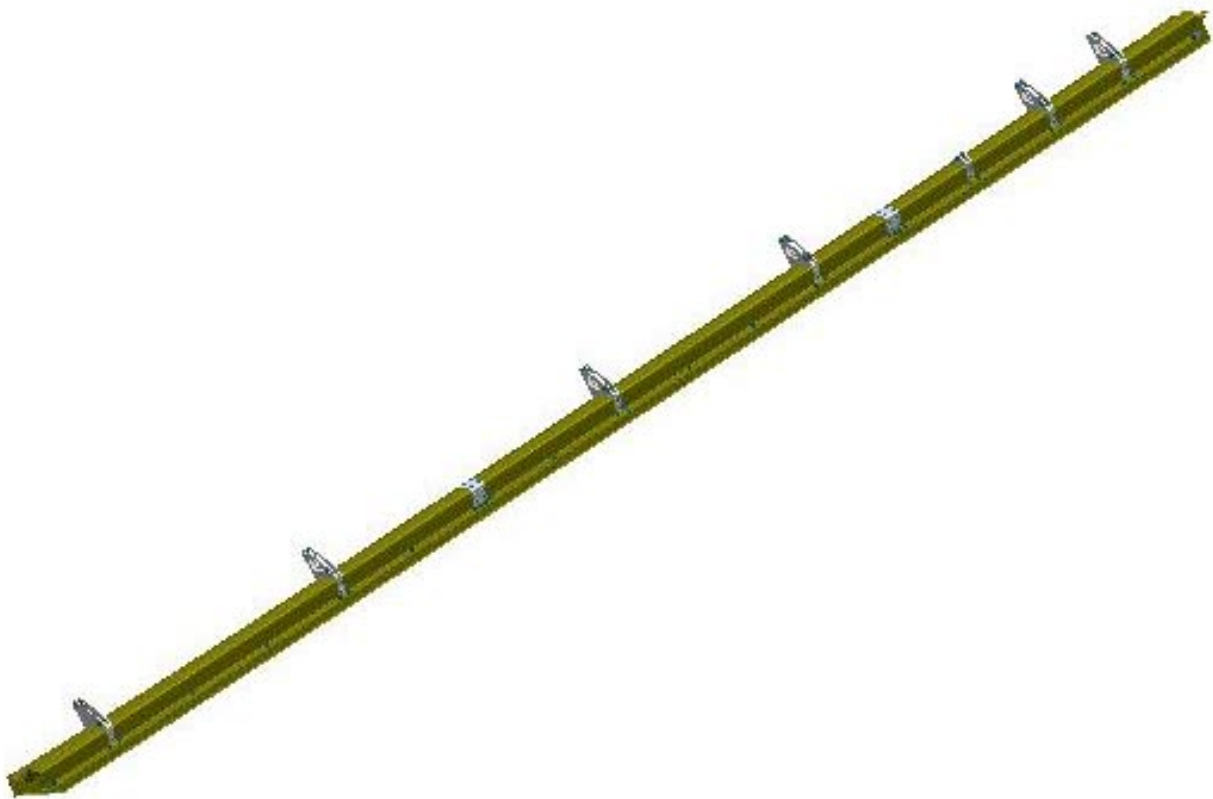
Final Demonstration F-22 Auxiliary Seal Door Demonstration Assembly
